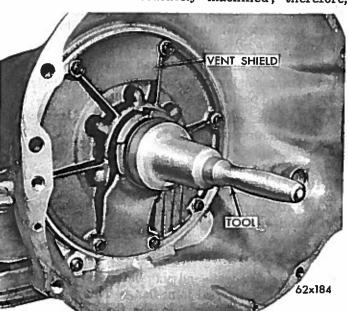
Installing Front Pump Oil Seal (Tool C-3860)
